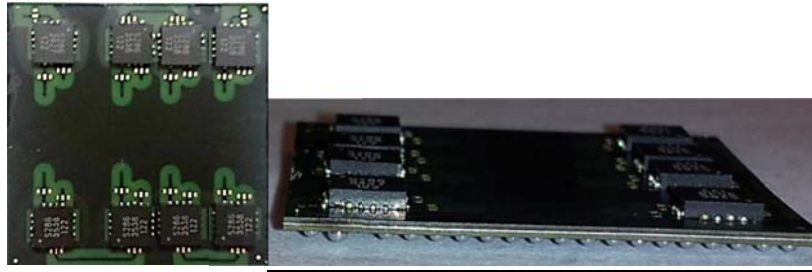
Top view and side view of the BGA TTD prototype (version B) with switches only
